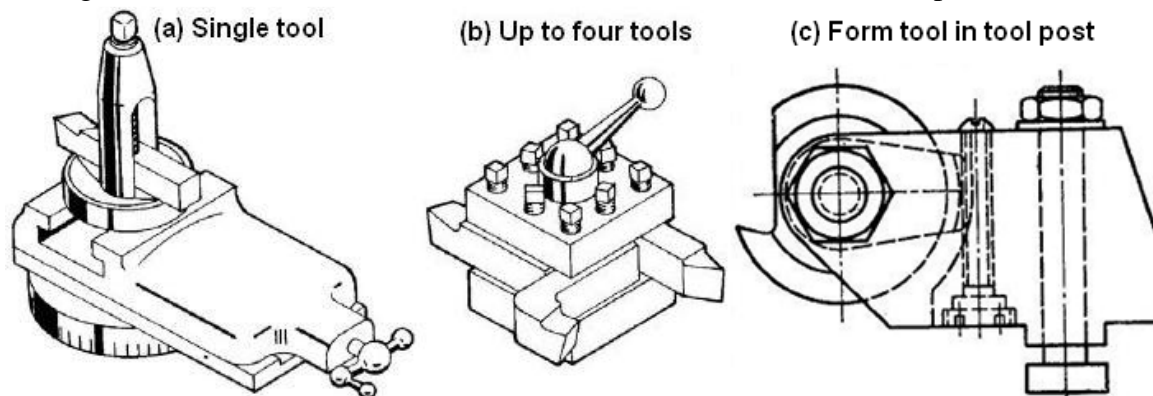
Mounting of (a and b) shank type tools in tool post and (c) form tool in tool post
